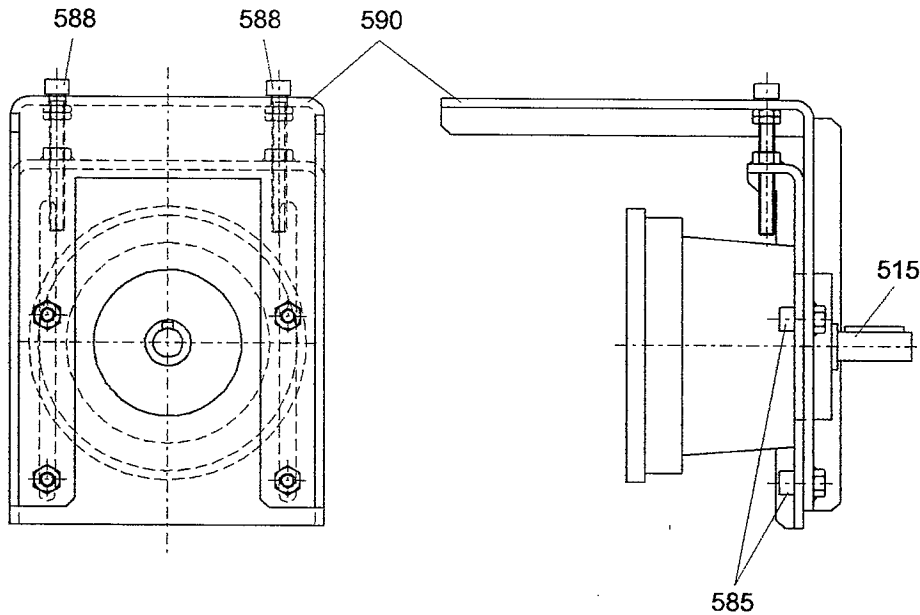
Mounting motor bedplates - IEC motors up to size 112
